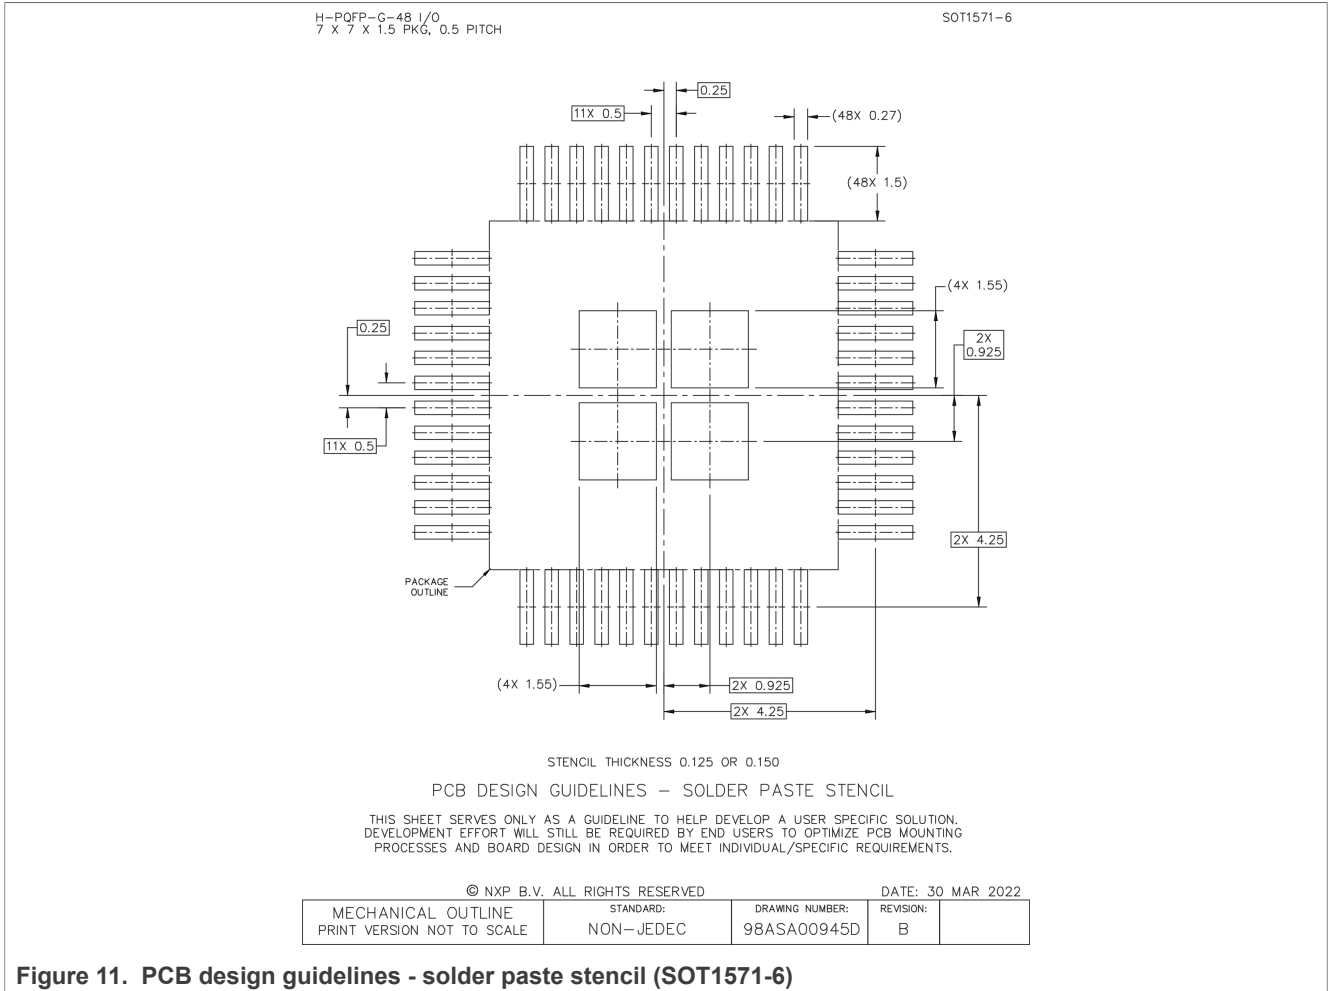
PCB design guidelines - solder paste stencil (SOT1571-6)
